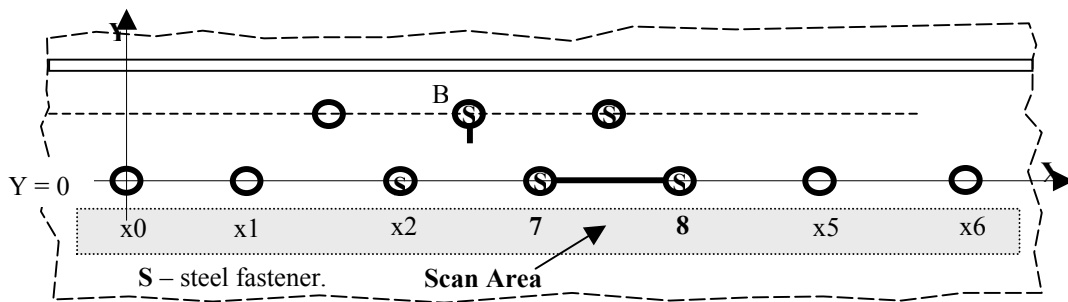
Schematic drawing showing location of axial slot between Holes #7 and 8 among steel fasteners.
